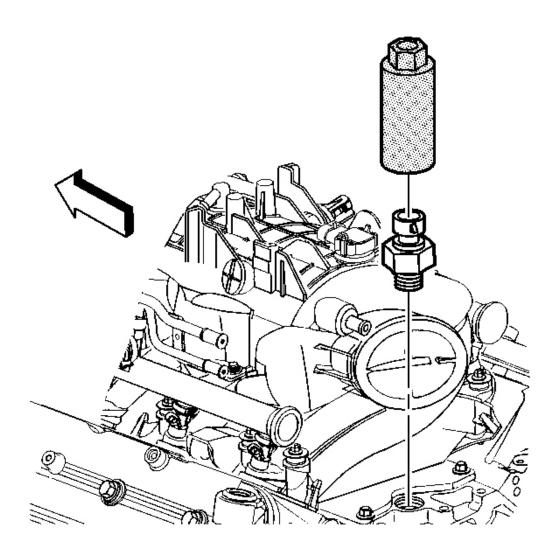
View Of Oil Pressure Sensor & J 41712 Courtesy of GENERAL MOTORS CORP.
